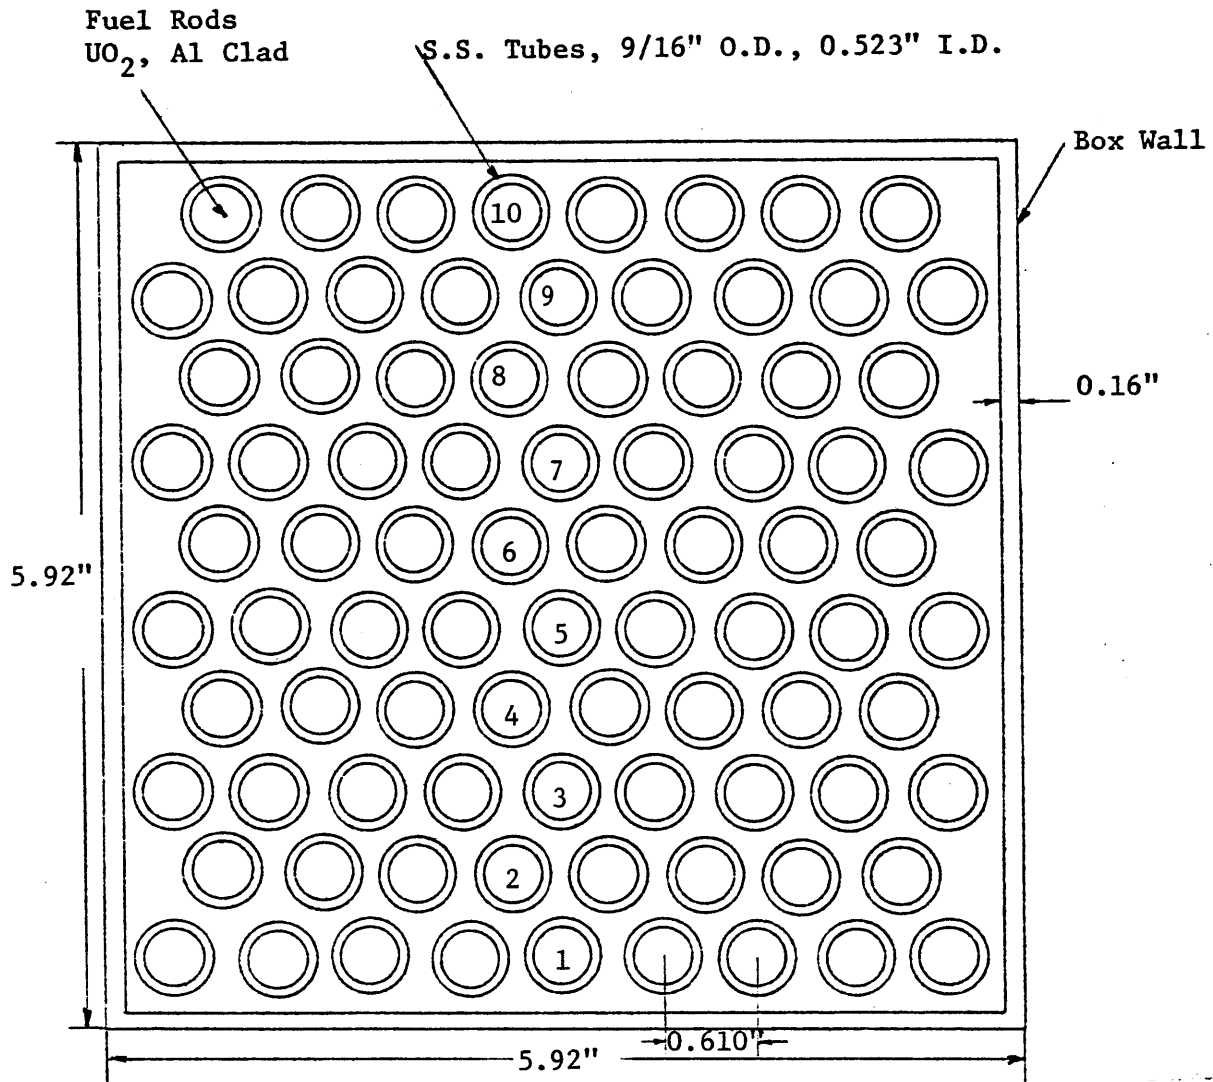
TOP VIEW OF ITS SHOWING EXPERIMENTAL FUEL ROD POSITIONS
